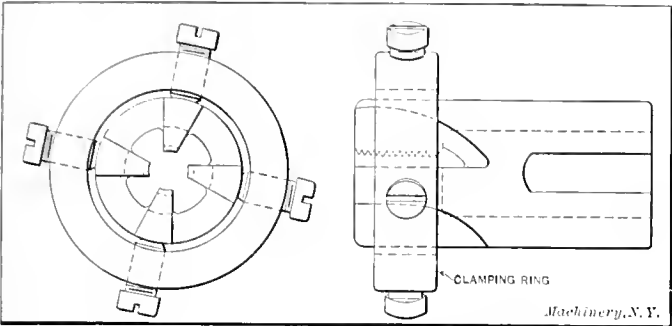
Spring Screw Threading Die and Adjusting Ring
